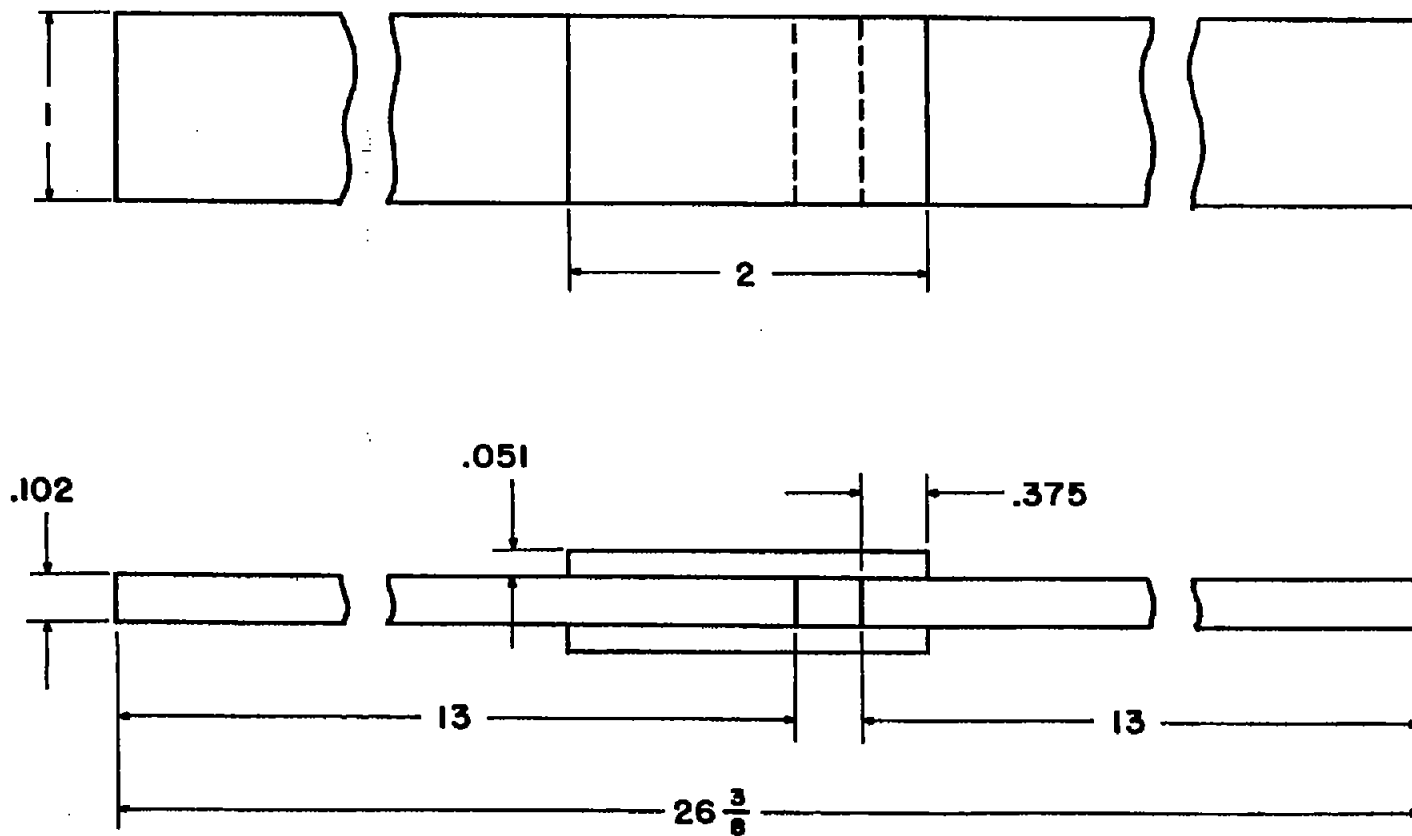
Double shear specimen with bonded joints. All dimensions are in inches.
